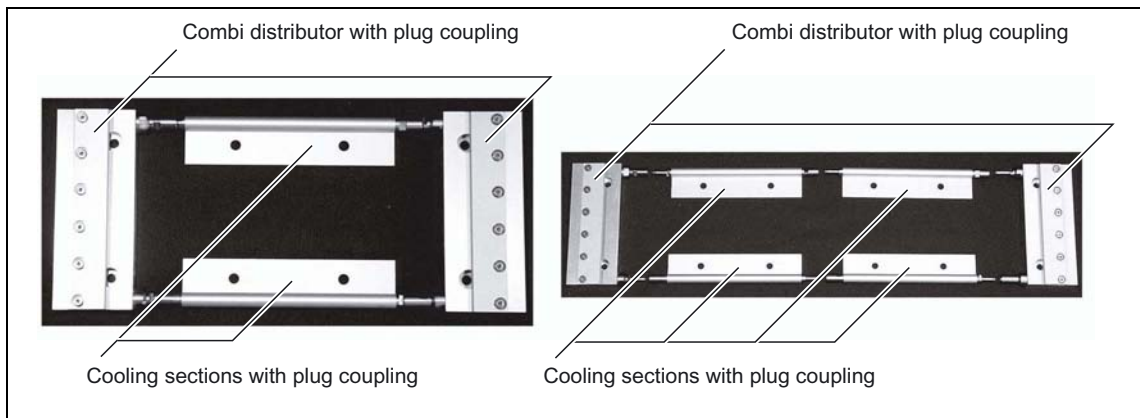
Position of the cooling sections and combi distributors (illustration without fastening screws)
